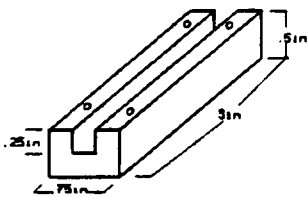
Prism Mount and Jig for the Waveguide Prism Coupler.
